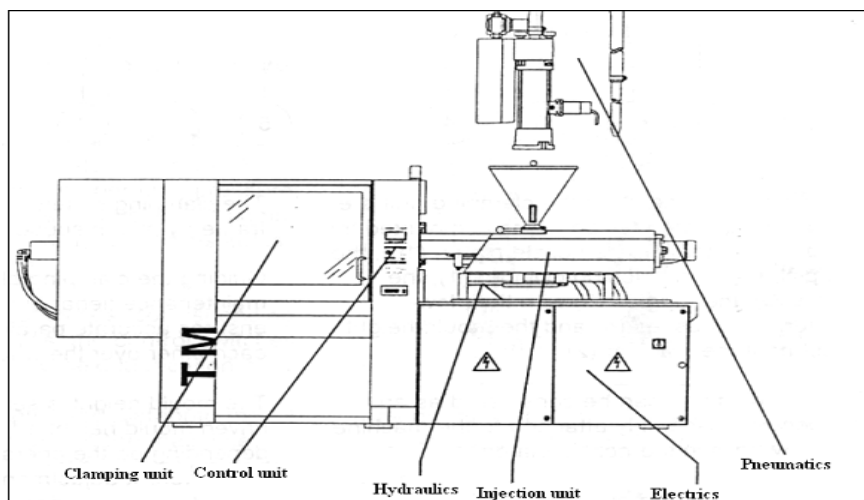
Structure of the Battenfeld TM 750/210 Machine
